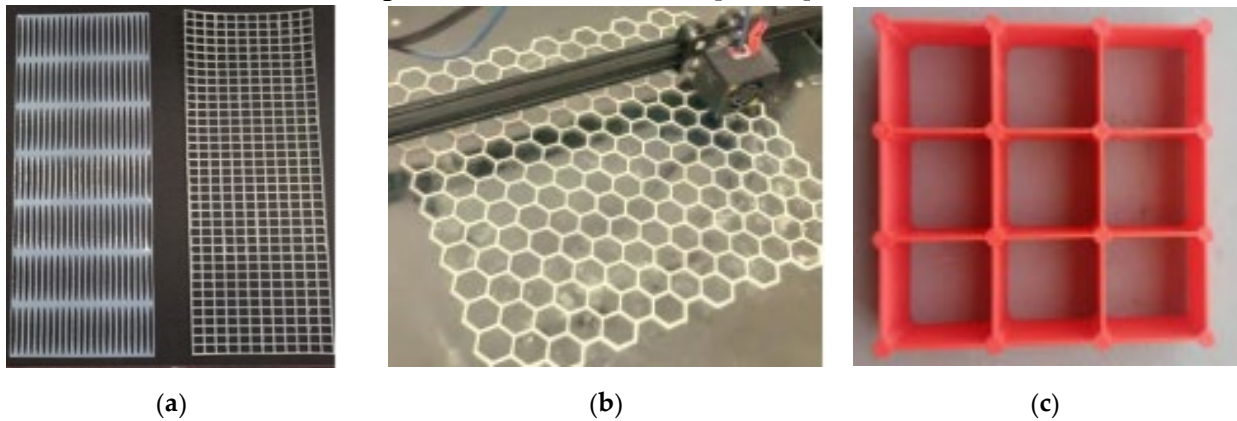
Geogrids and geocells produced by 3D printing: (a) 3D printed reduced size (one-tenth size) geogrid [72], (b) 3D printed geogrid with honeycomb holes [76] and (c) 3D printed geocell [77].
